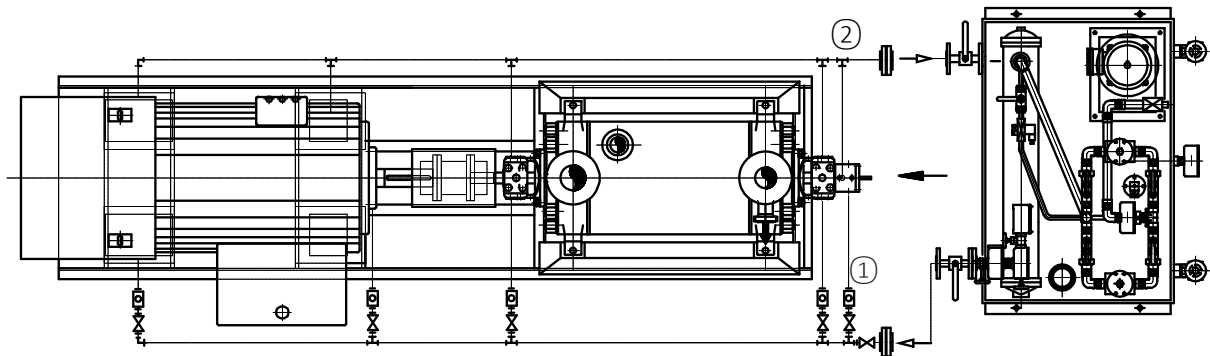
Lube oil system behind the pump, for lubrication of the pump bearings, or gearbox or electric motor bearings
